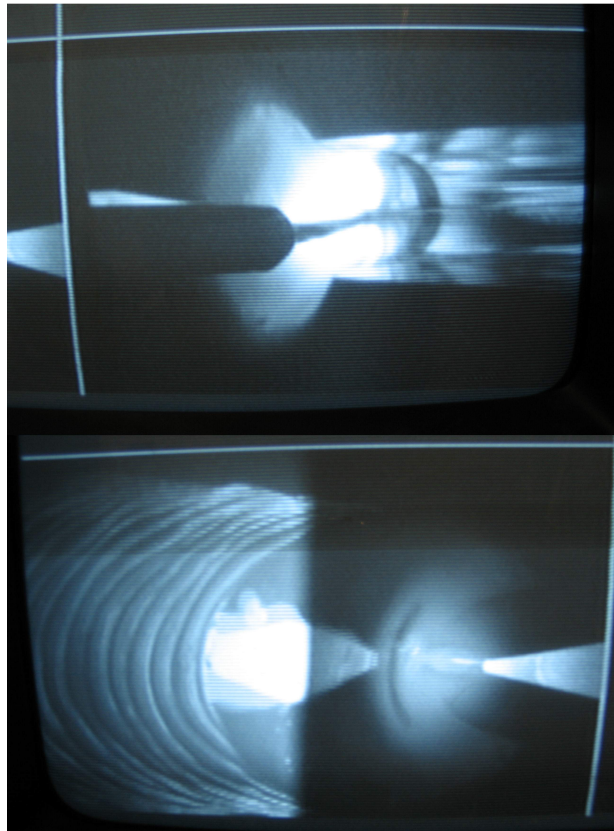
Leading edge (top) and trailing edge (bottom) arc viewing cameras during narrow groove TIG welding.
